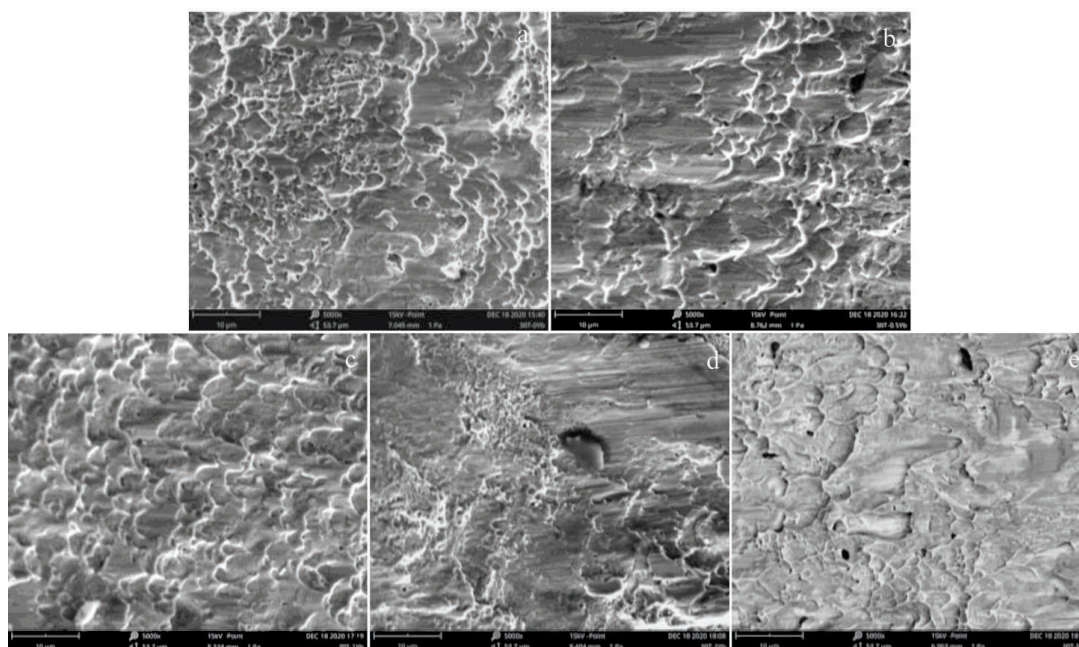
Fracture morphologies of BAg30- x Yb brazed joints: (a) $x=0$, (b) $x=0.5$, (c) $x=1$, (d) $x=2$, and (e) $x=5$
